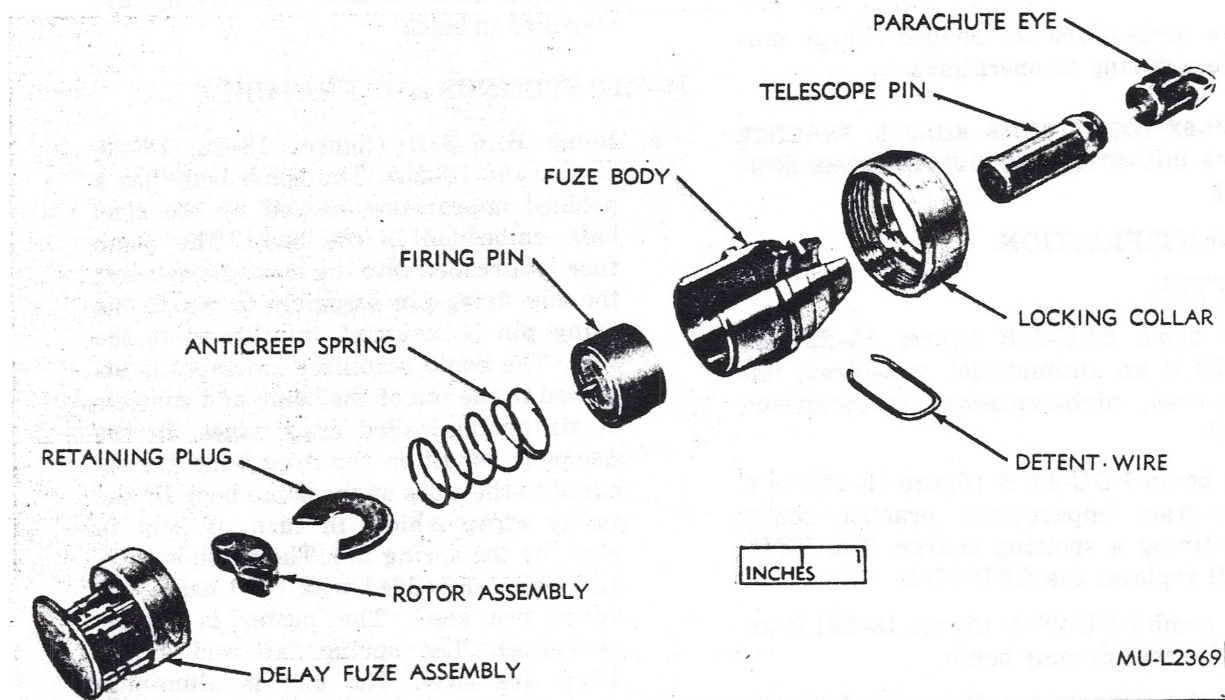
Fuze for Bomb BLU-7A/B—Exploded View
